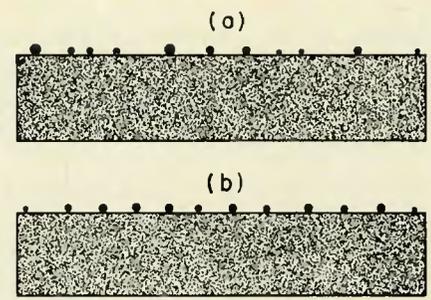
Metal drops deposited on water cooled copper plate. Pulse frequency: (a) 0, (b) 25 Hz. Wire diameter 1.6 mm (0.062 in.). Wire feed speed 3.8 m/min (150 in./min). Welding speed 12 m/min (472 in./min)
